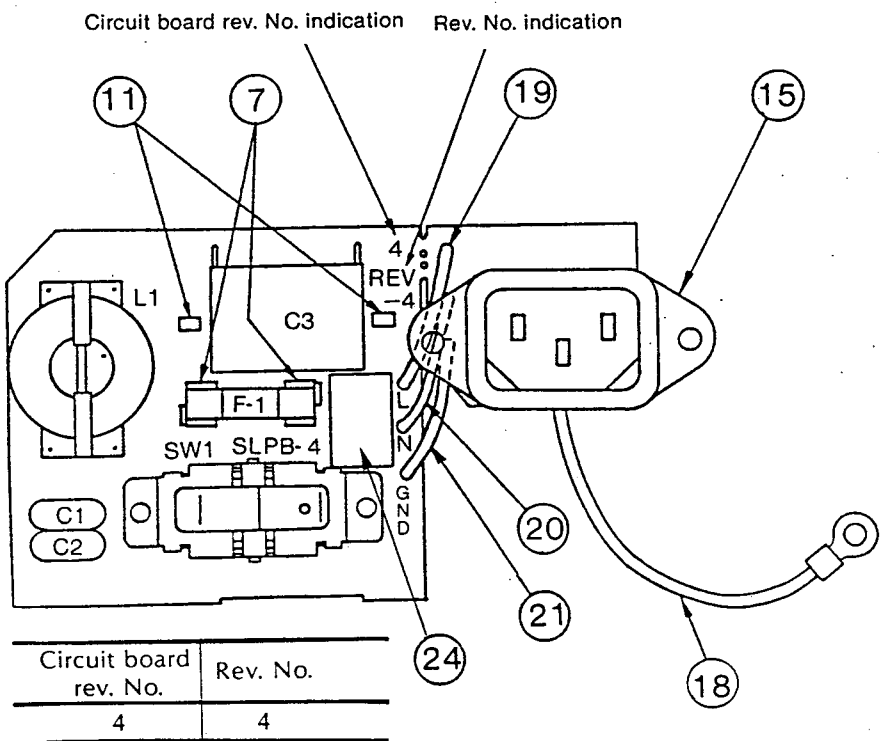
(3/7) Printed-Circuit Board (3YU5003-5611G3)
